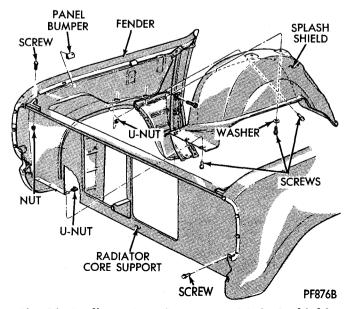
Radiator Core Support and Splash Shield (D-W 1,2,3)
